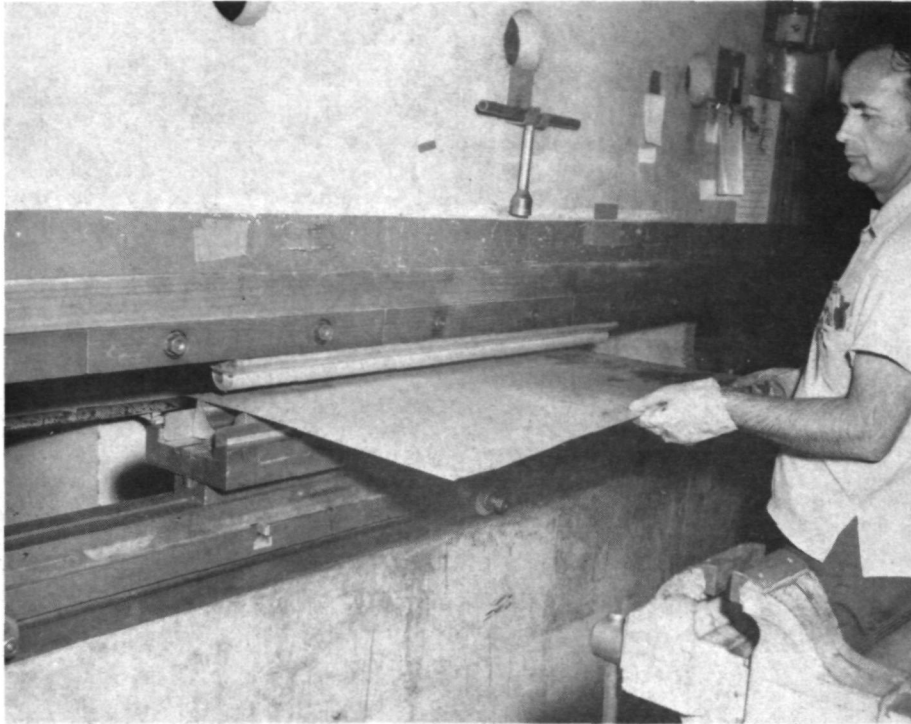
FLAT BLANK POSITIONED IN UNIFORM SECTION FORMING TOOL
